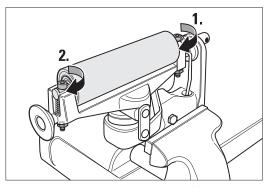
Tighten the side without spring (1) and then the side with spring (2), so that ...
